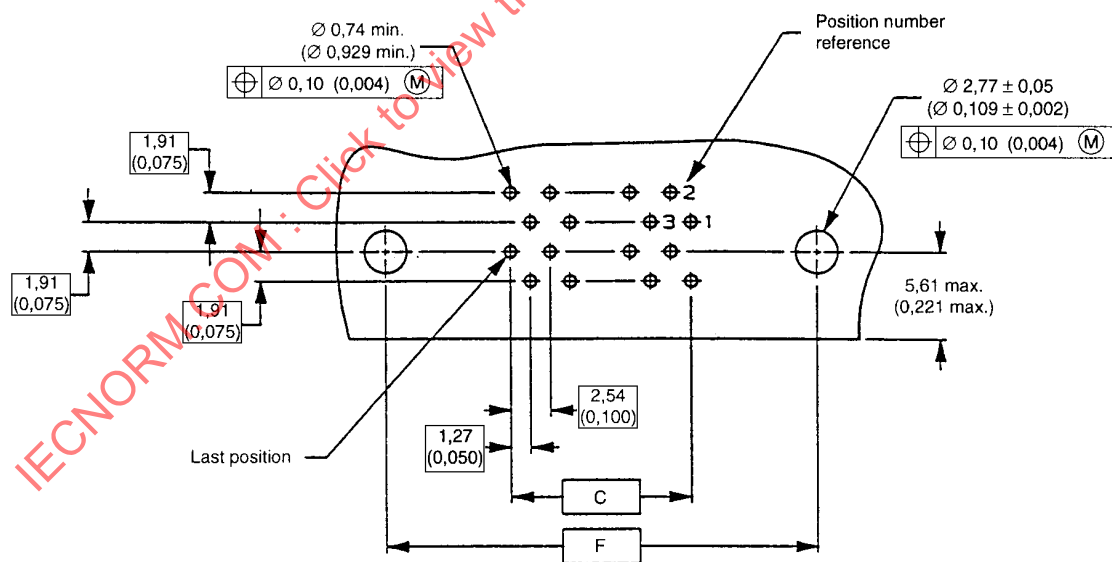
Detail for 16, 20, 28, 36, 40, 60, 68, 80, 100 and 120 positions, connector side of board
